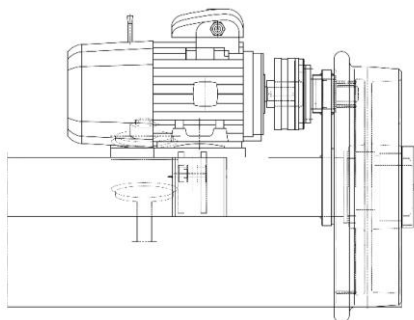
Electric drive of a guide roller with a 5 kW motor and 1430 rpm
